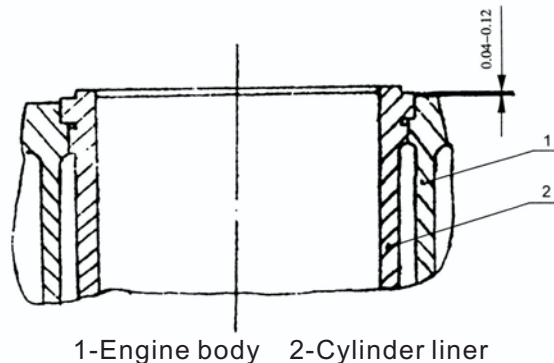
Distance between cylinder jacket flange plane and engine body top face
